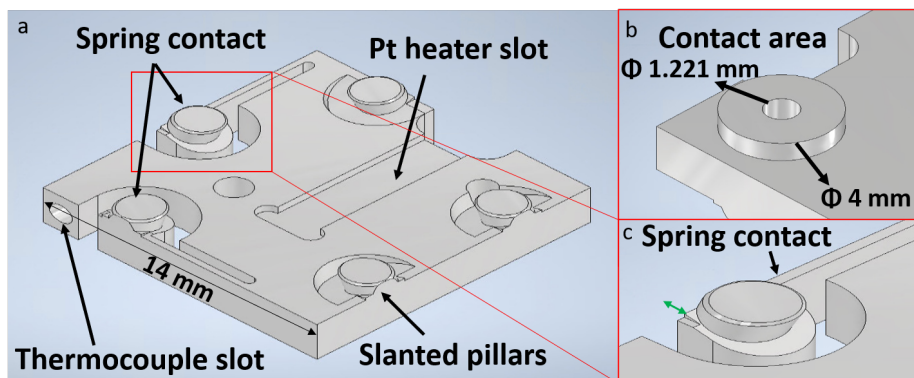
a) CAD drawing of the heater block made of Al (6082 - T6) showing the different parts of the block along with two spring contacts which allow for the thermal expansion of the substrate. b) CAD drawing showing the bottom of the heater block with the single contact area, which makes a contact with the isolator block providing thermal isolation. c) Zoom-in of the spring contact, which can be moved as indicated by the green arrow is used to mount the Si chip of $10 \times 10 \text{ mm}^2$.
